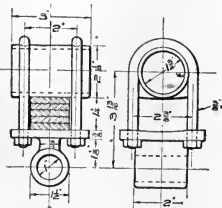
DETAIL OF REAR AXLE SPRING CLIP AND REACH FITTING.
